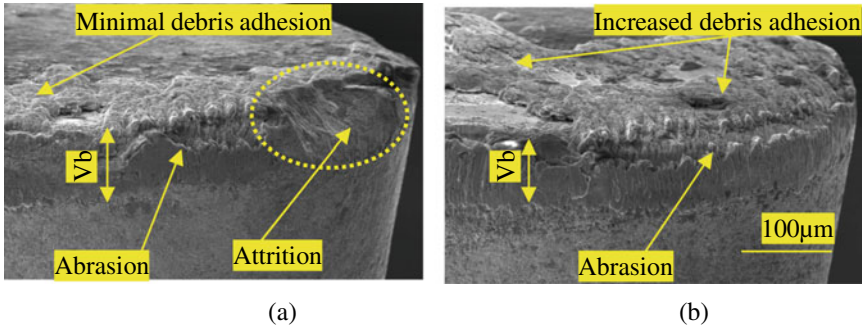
Flank face of a CI, b DTI after 160 mm of machining
